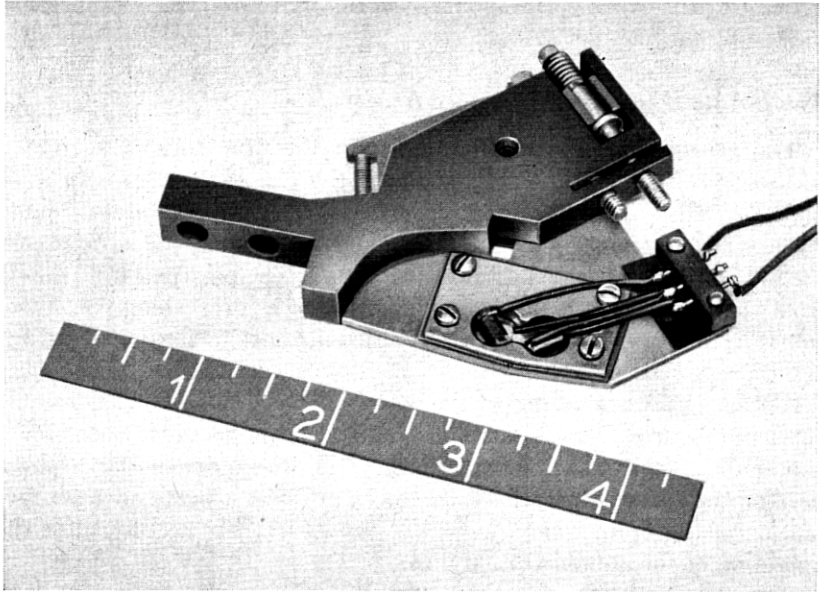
Magnetic head and mounting bracket showing means of adjustment.
